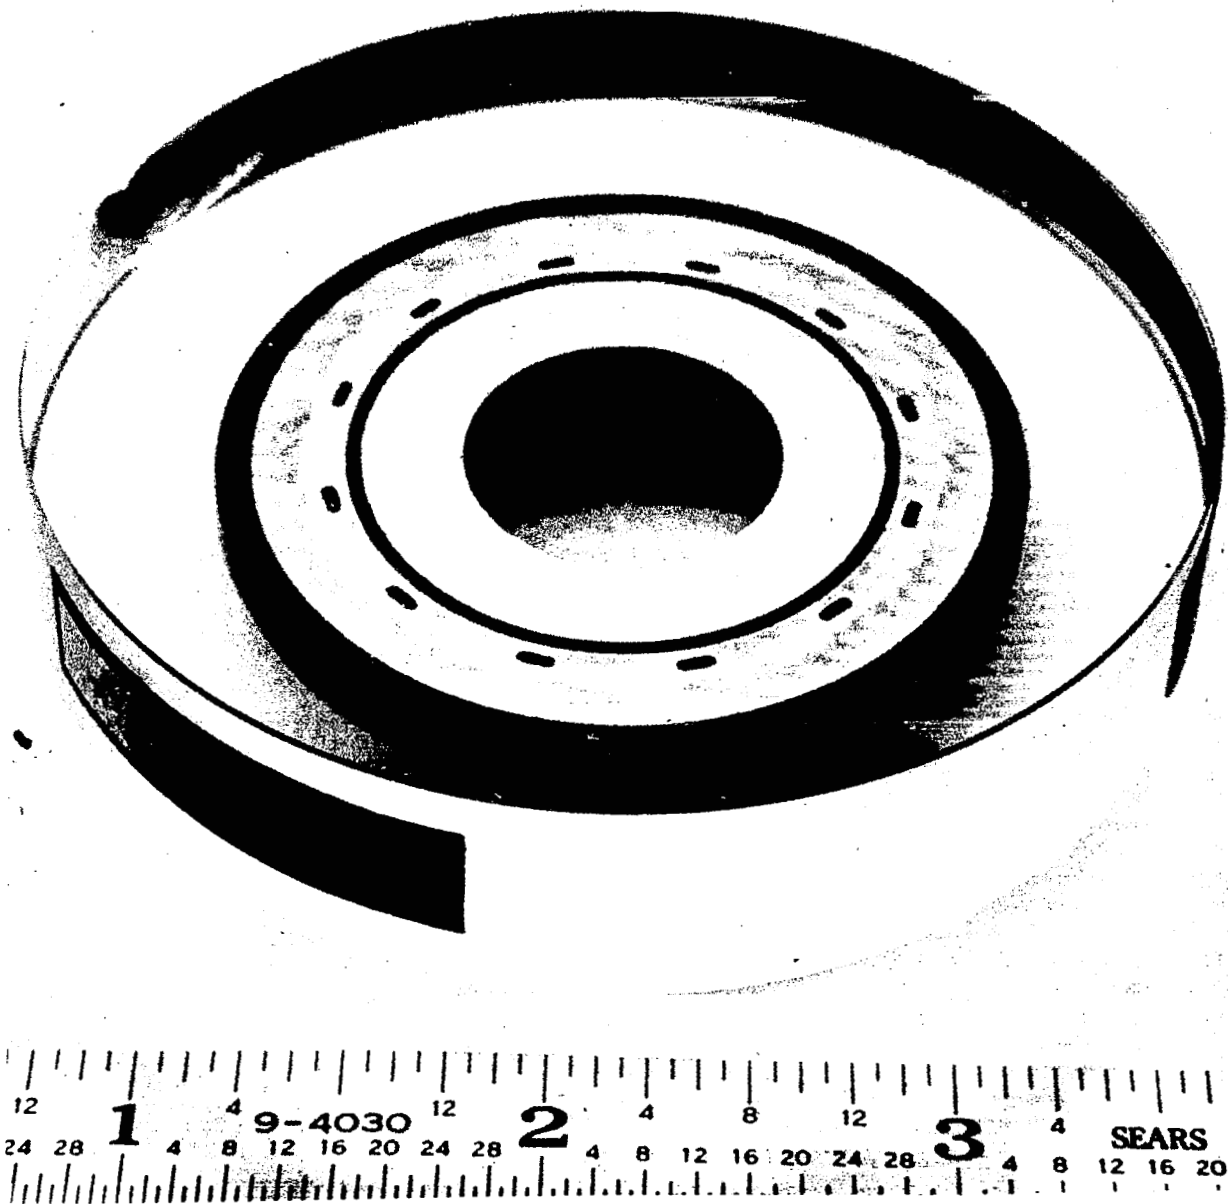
Optical Flat on Wet-Face Sealplate after Test
